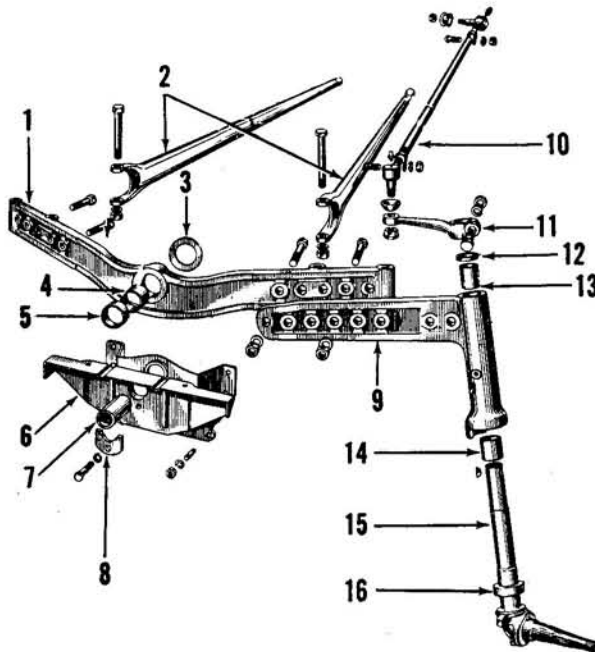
Exploded view of front axle and related parts used on the Fordson Dextra. Similarity to American produced Ford tractors will be noted.
